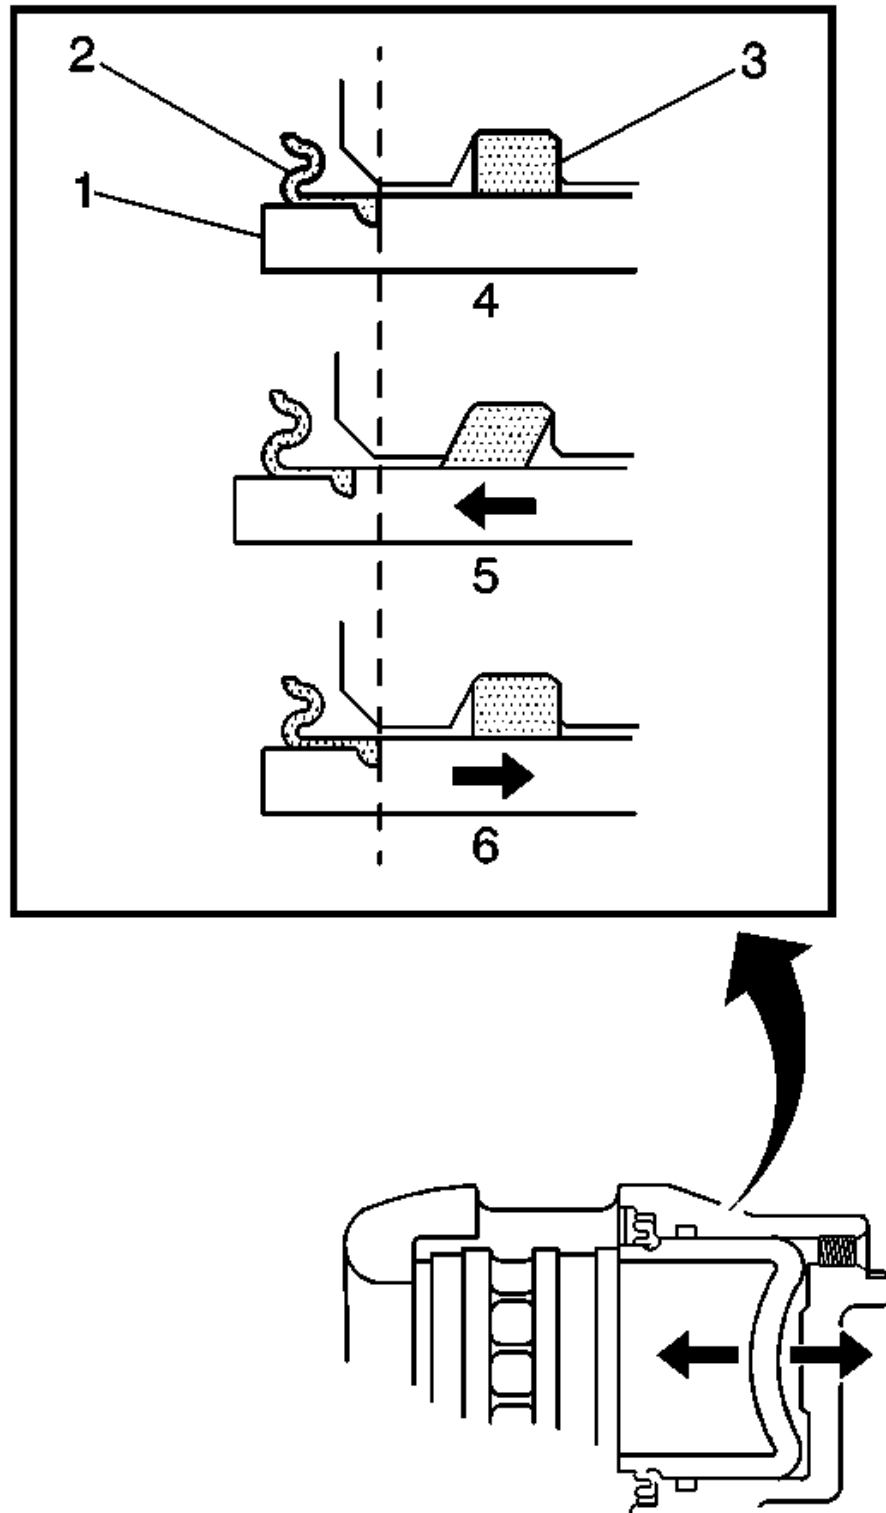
Identifying Brake Caliper/Pad Inspection Areas
